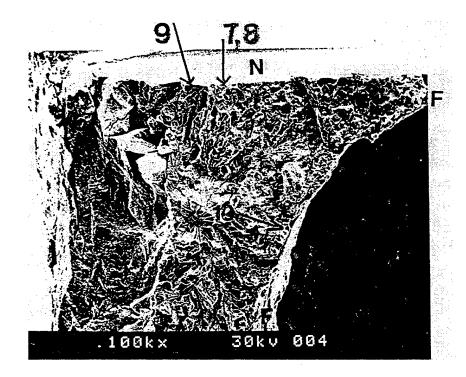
Transverse fracture surface near the laboratory-induced notch (100X).
